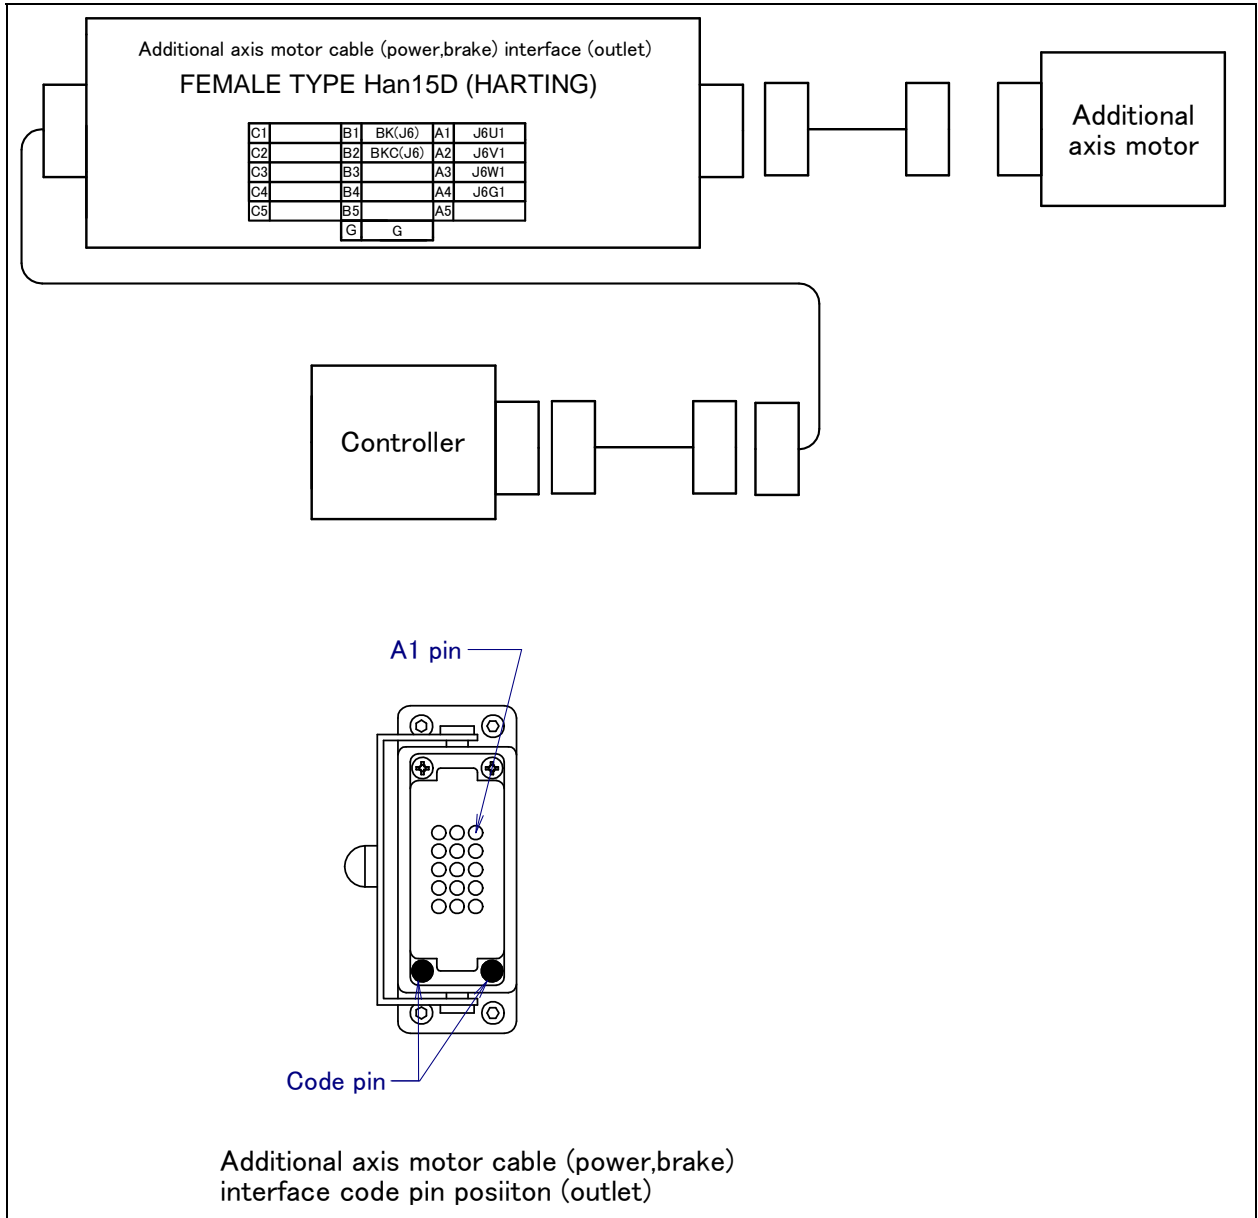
(u) Pin layout for additional axis (1-axis) motor cable (power and brake cables) (ARM) interface (option) (M-710iC/50H)
